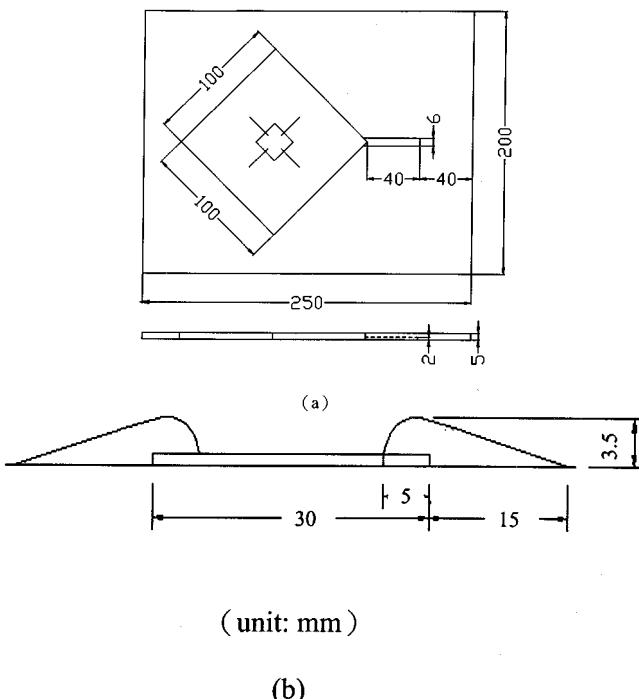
Sketch showing (a) geometry of the cavity and (b) typical wirebond geometry.
